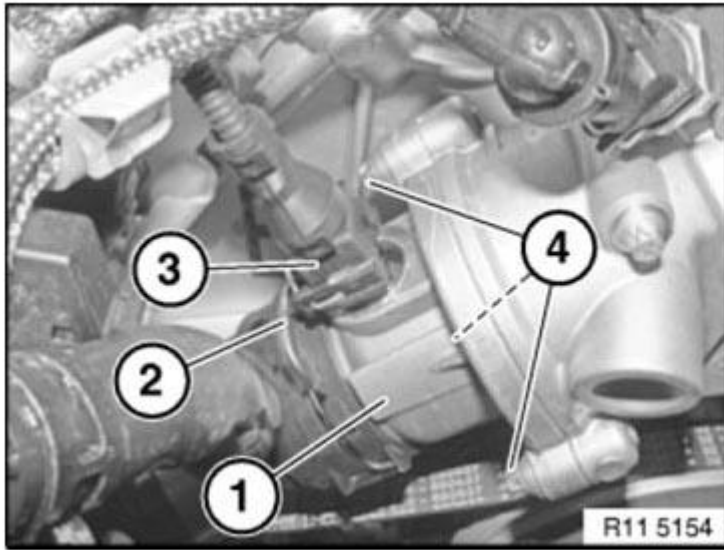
Identifying Plug Connection, Coolant Hose And Coolant Thermostat
